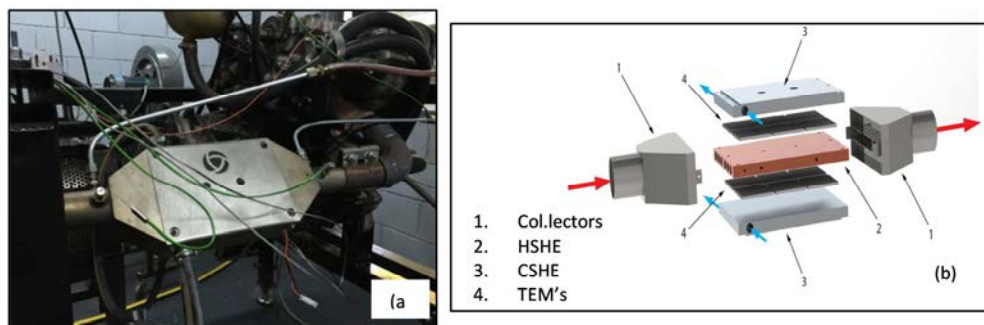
ATEG engine installed (a). Parts of the ATEG (b)
